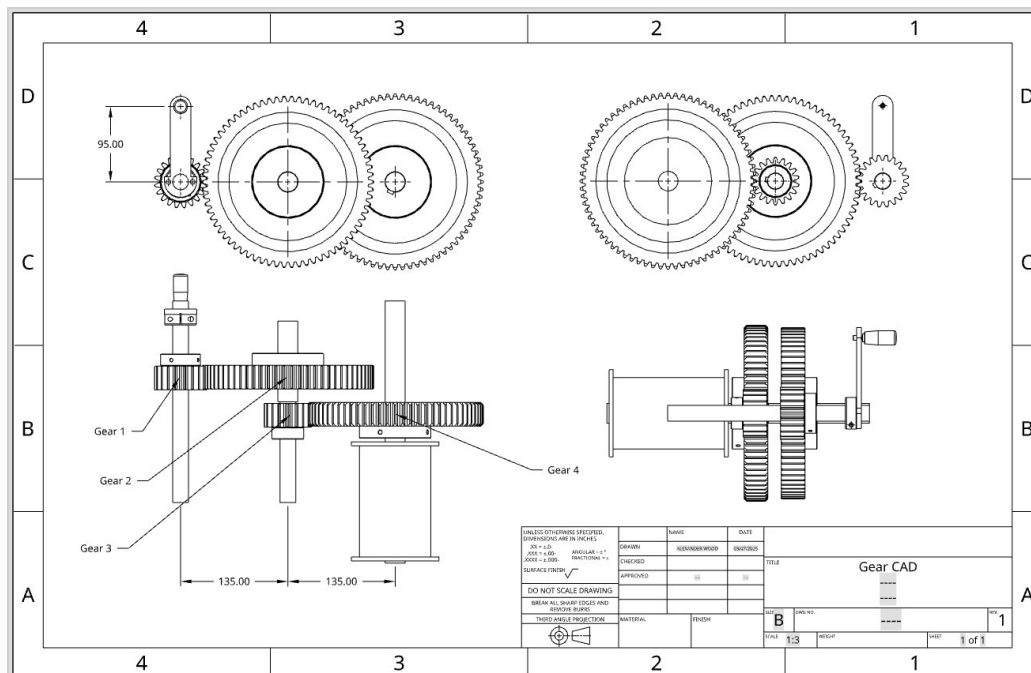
The gear train drawing. The crank drives through staged gears to the winding drum, with center distances and the crank arm called out.
